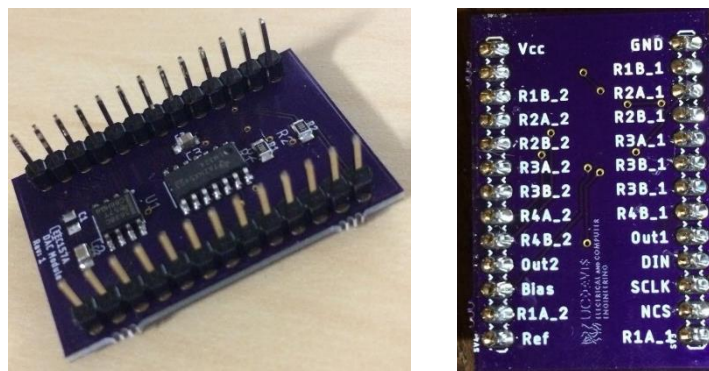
(Left) Bottom view of the DAC PCB module. (Right) Top view of the DAC PCB module.
